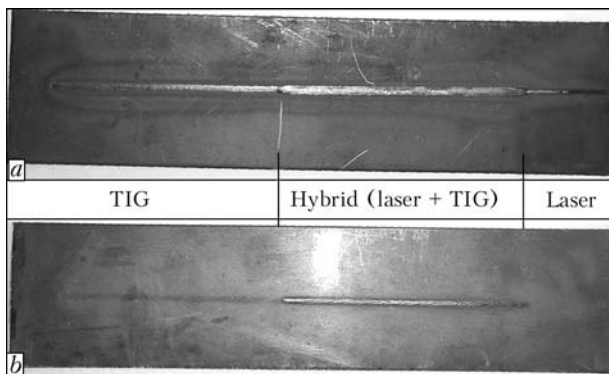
Top (a) and back (b) view of welded samples 1.2 mm thick ($P_L = 250\text{ W}$, $I_a = 20\text{ A}$, $v_w = 100\text{ mm/min}$, TIG torch is behind the laser beam)
